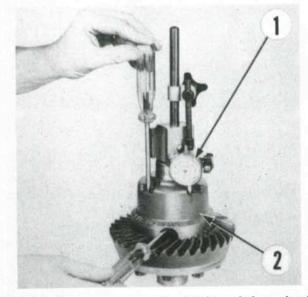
Measure limited slip clutch pack free play by inserting dial gage (1) through case half (2) to contact clutch plate. Refer to text.
